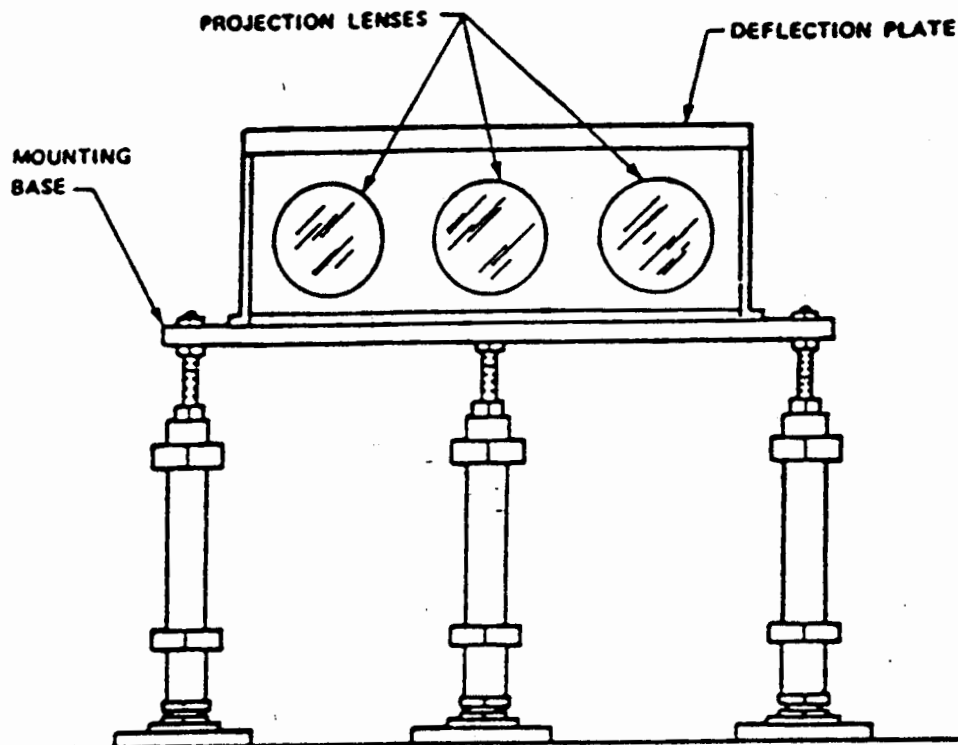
LAMP HOUSING ASSEMBLY (FRONT VIEW)
